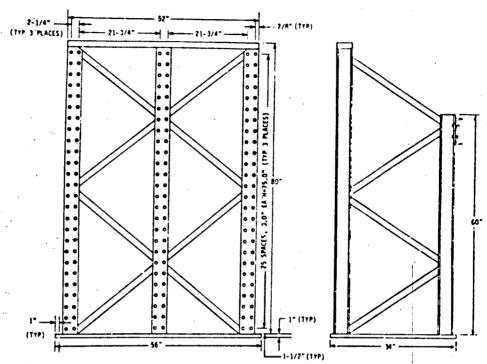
Fixture for bulkhead-mounted and bulkhead-supported items. This fixture is built with main members of 4-in. (10-cm) H-beam buttressed with 4-in. channel sections. The vertical mounting surface, 80 in. (2 m) high by 56 in. (1.4 m) wide, is provided with many holes for attaching sections of plate to pick up the item's bulkhead-attachment points.
